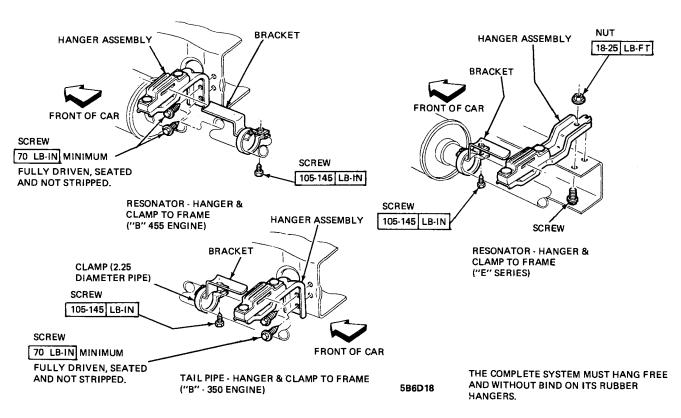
D-18 B-C-E Series Exhaust System Attaching Parts Sedans & Coupes Rear
